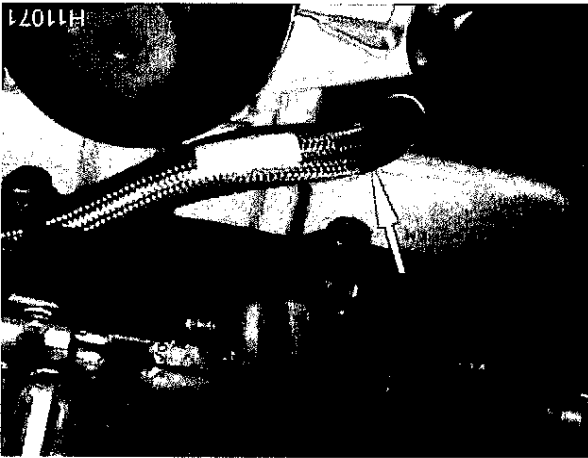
Bad alignment of high-pressure oil hose (hose twisted)
